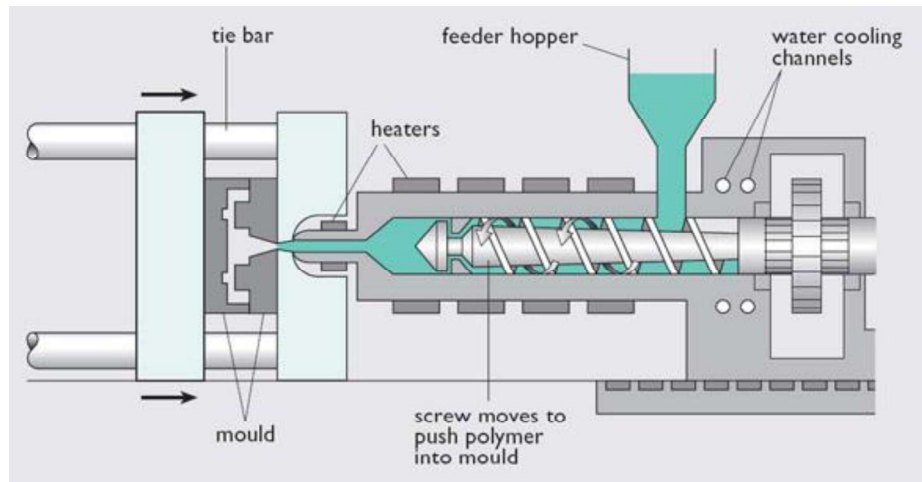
Injection molding process used to manufacture the pressure gauge cap.
